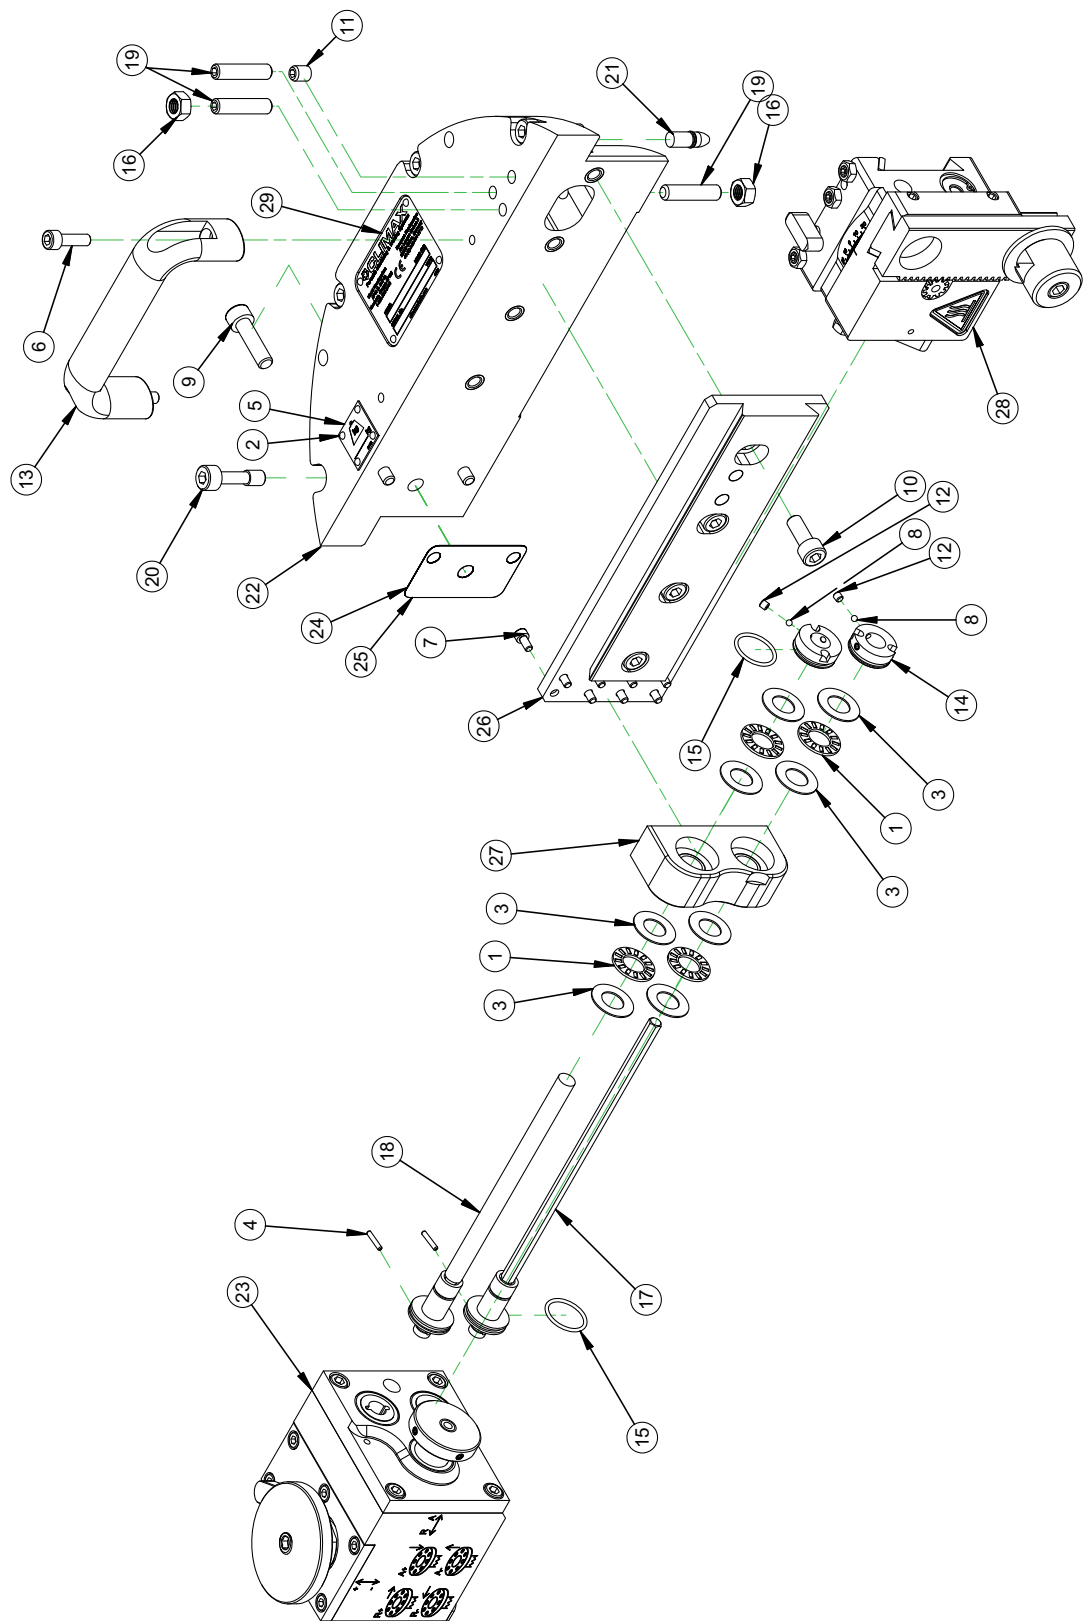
FF1200 RADIAL AND AXIAL SLIDE ASSEMBLY (P/N 79192)
